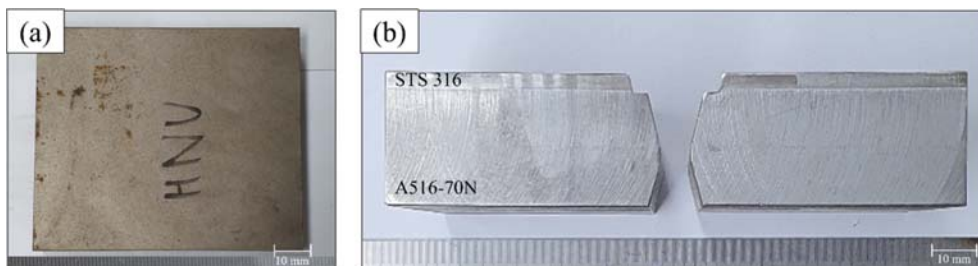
Appearance of the (a) plane view plate and (b) cross section of X groove STS 316L test pieces.
